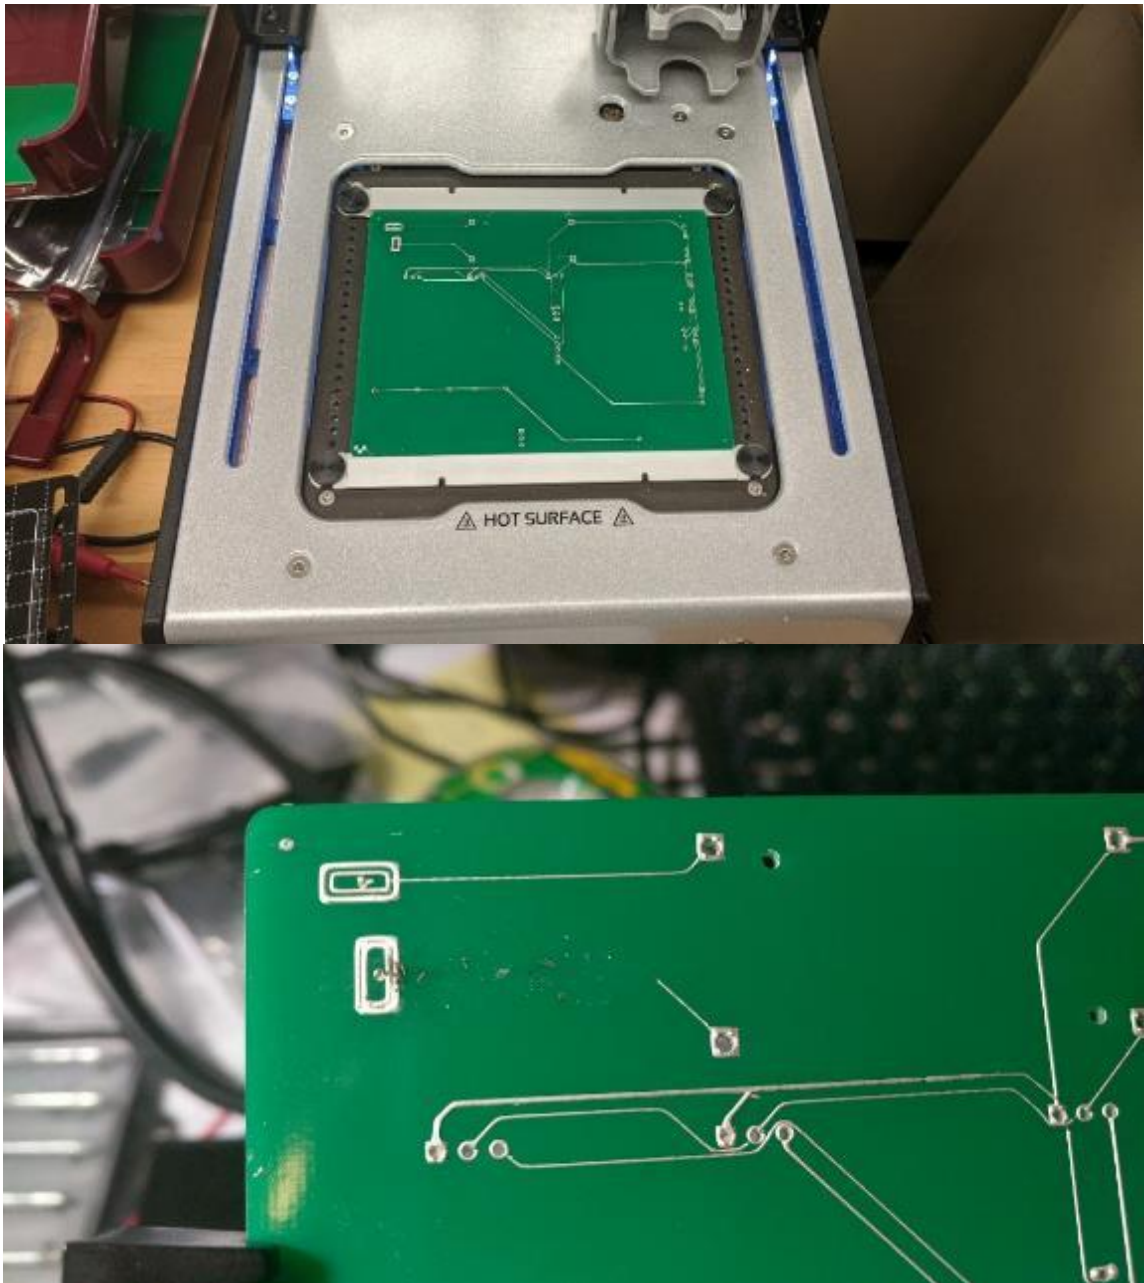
(a) Printing of the Circuit Board (b) Burnt Silver Trace.
